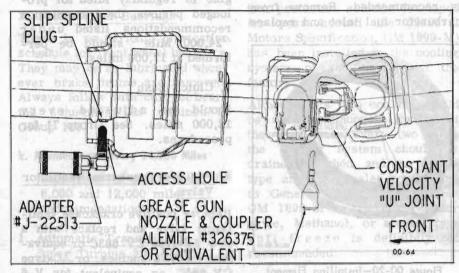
Propeller Shaft Lubrication Points (45-56-48000 Series)
